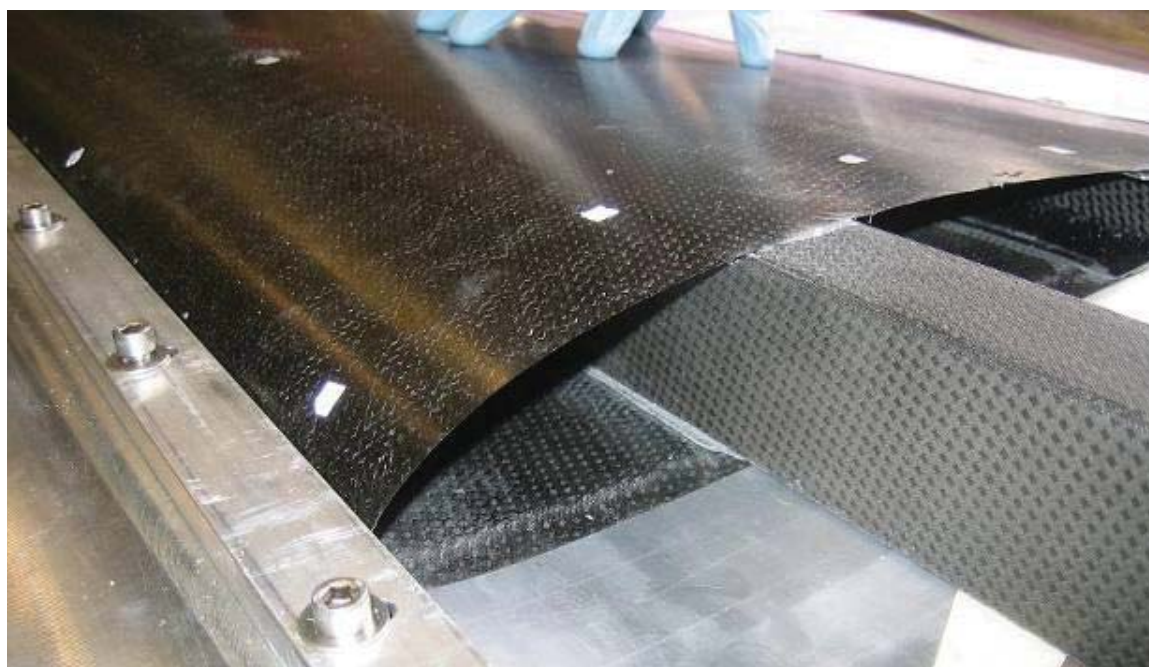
Assembly of component pieces with adhesive applied into the bonding assembly.
